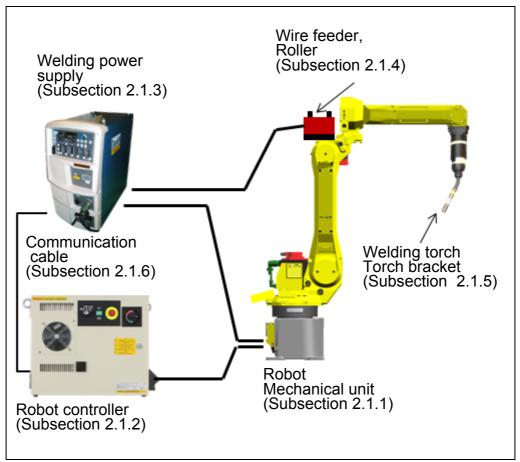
(a) Configuration of robot with welding power supply option
